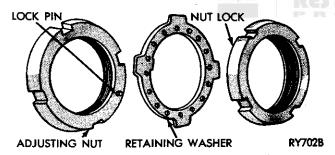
Wheel Bearing Adjusting Nut, Retaining Washer & Nut Lock
